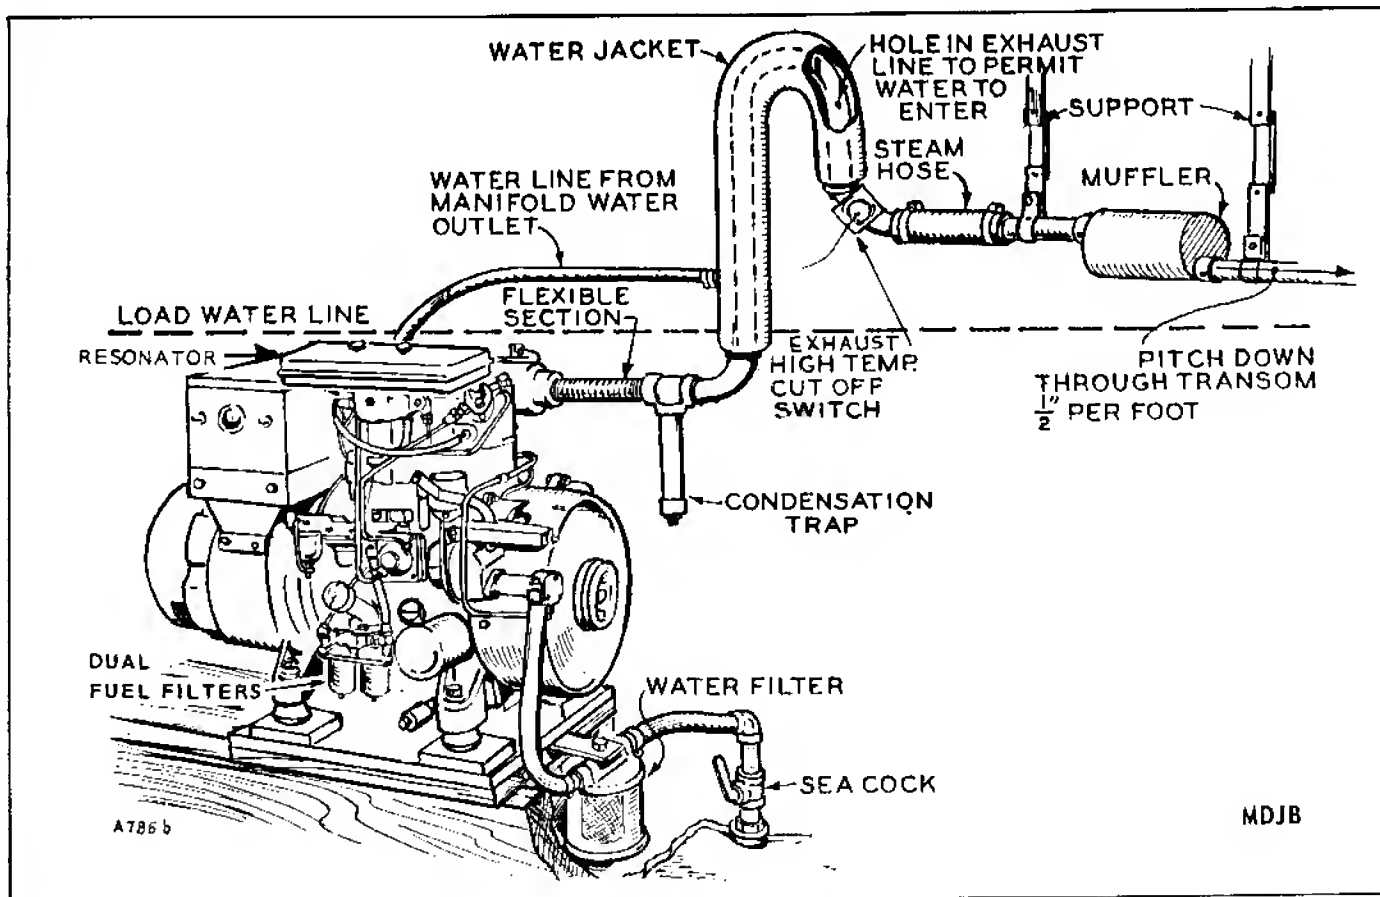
TYPICAL WATER-JACKETED RISER EXHAUST SYSTEM
